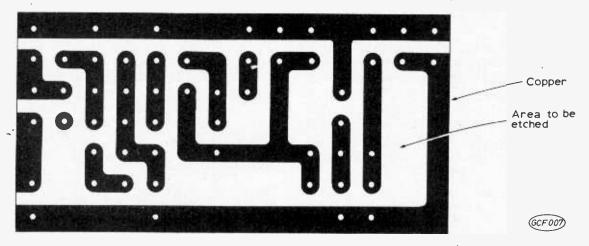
When the layout is finalised it must be reversed on to the board as shown here, complete with the holes required, drilled after etching.
